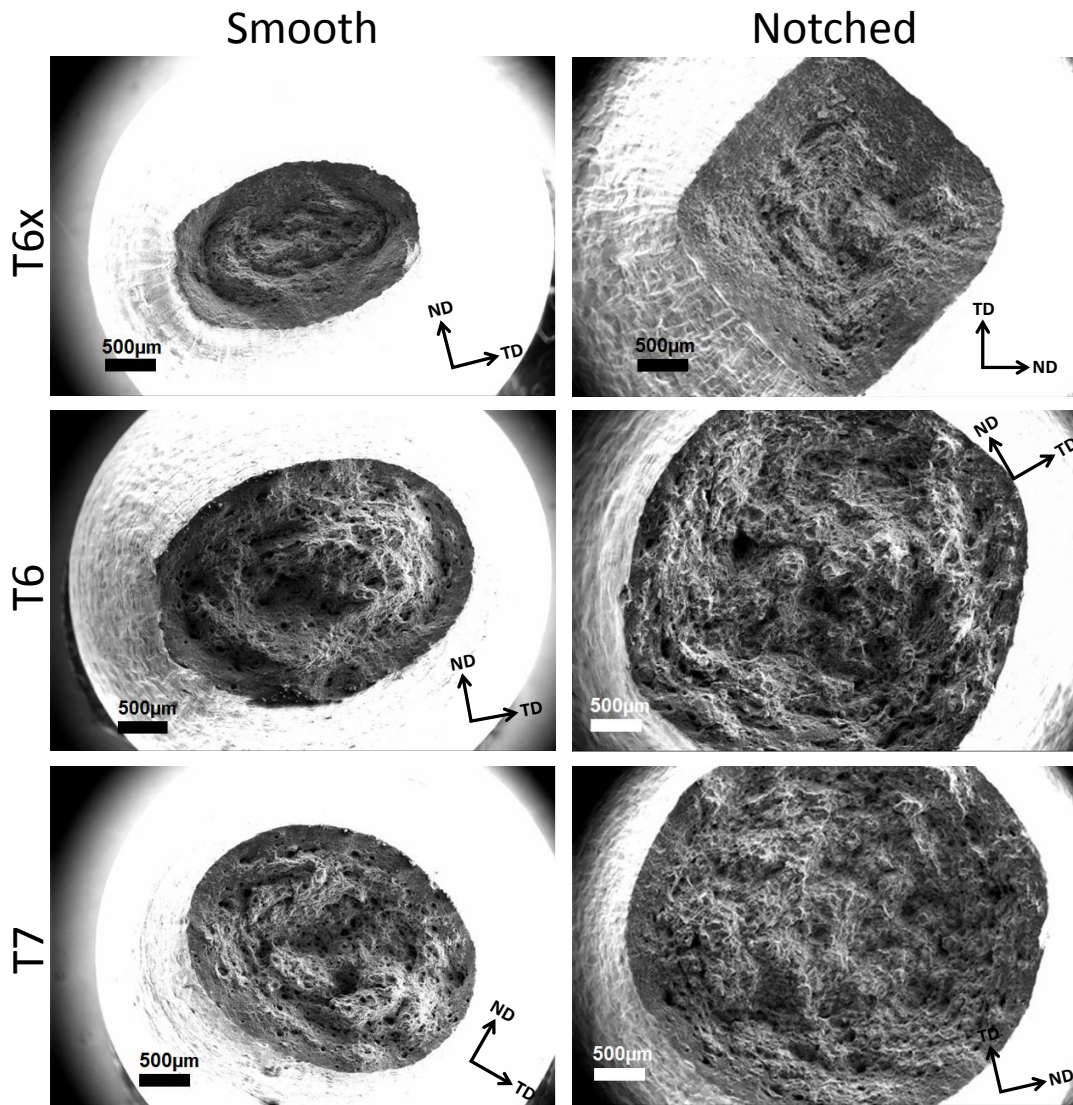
Global fracture surfaces of smooth and notched EX samples.
